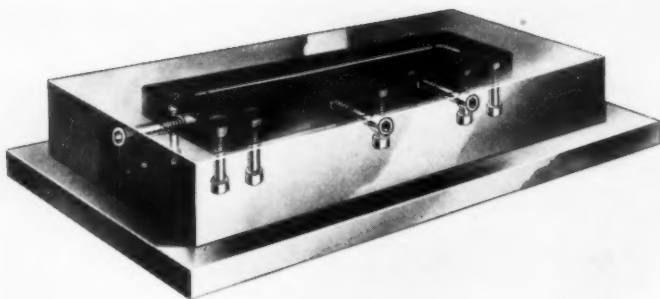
Draw and blanking dies for irregular sections may be readily produced by making the carbide inserts in sections and attaching them with screws or studs as shown here. Machineable inserts are imbedded in the carbide before delivery to die manufacturer. Die manufacturer then drills and taps these inserts.
